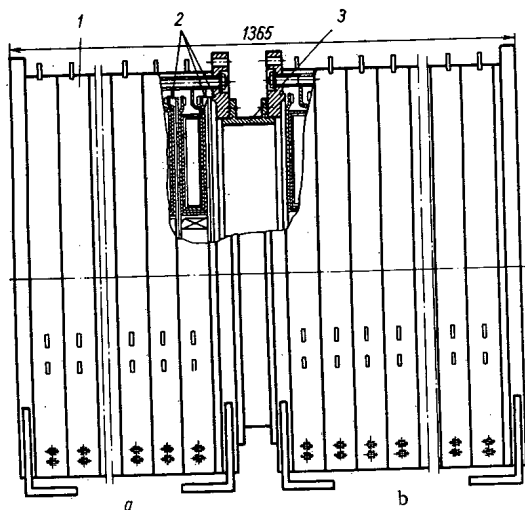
Accelerator sections: 1) inductor; 2) vacuum sealing; 3) connecting tube.
